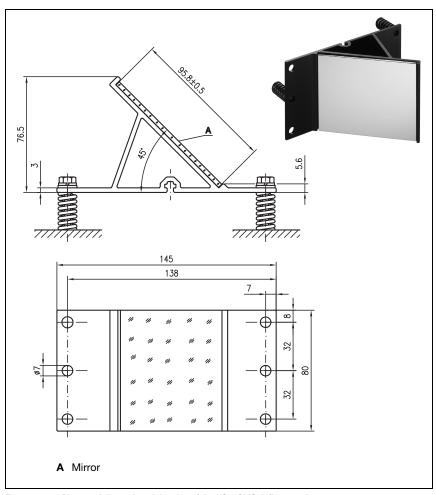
Photo and dimensioned drawing of the US 1 OMS deflector unit
